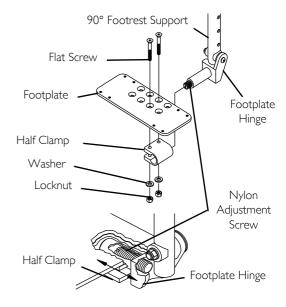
Adjusting Adjustable Angle Flip-Up Footplates
